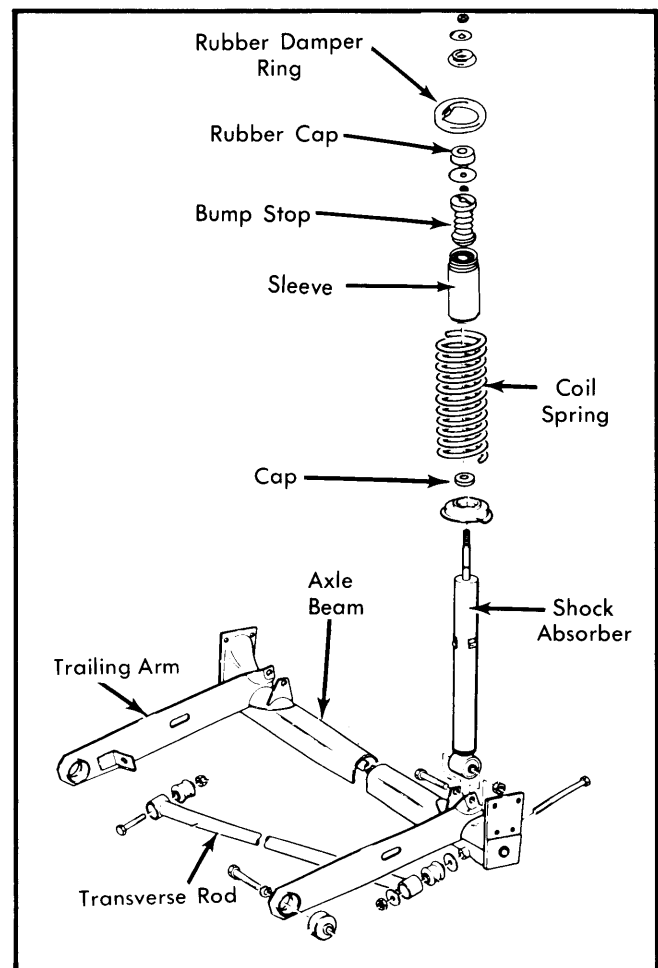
Exploded View of Audi 4000 Rear Suspension
